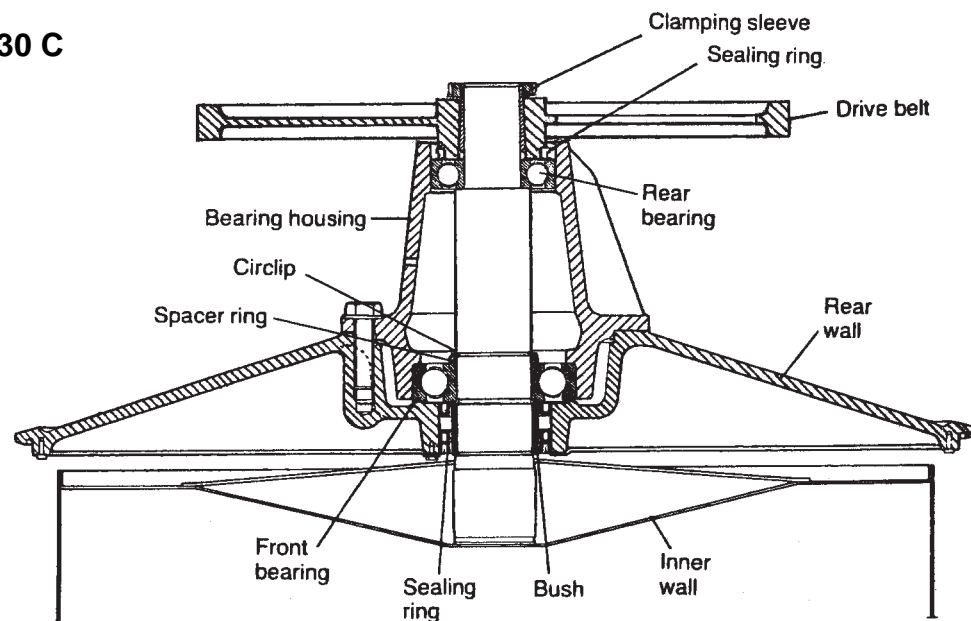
The back gable and the bearing trunnion housing are constructed of a webbed heavy casting for extra rigidity. The bearings are protected against infiltration of water by three neoprene seals. An intermediate safety outlet provides an escape for any possible condensation.
